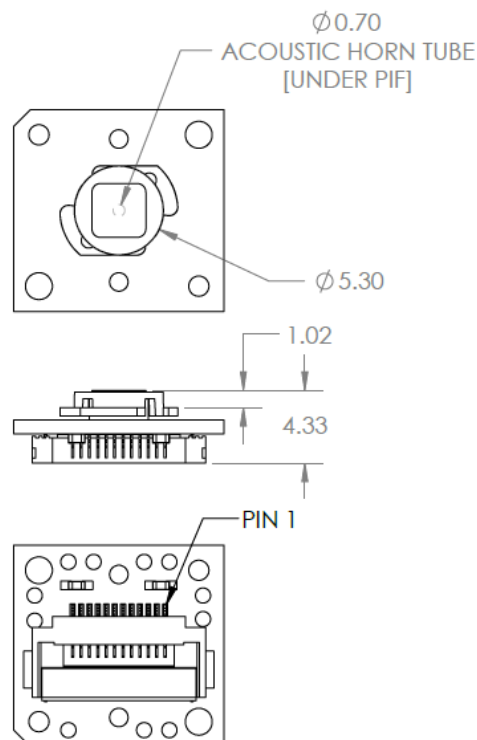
Dimensions of the EV_MOD_ICU-10201-00 Assembly
